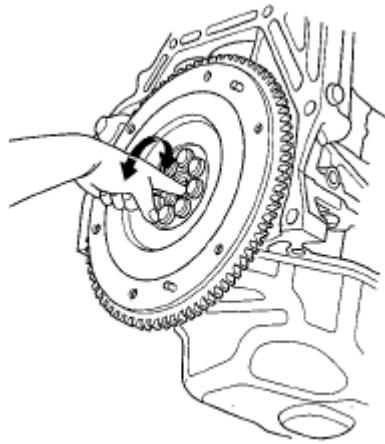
Inspecting Inside Surface Of Crankshaft Pilot Bush
